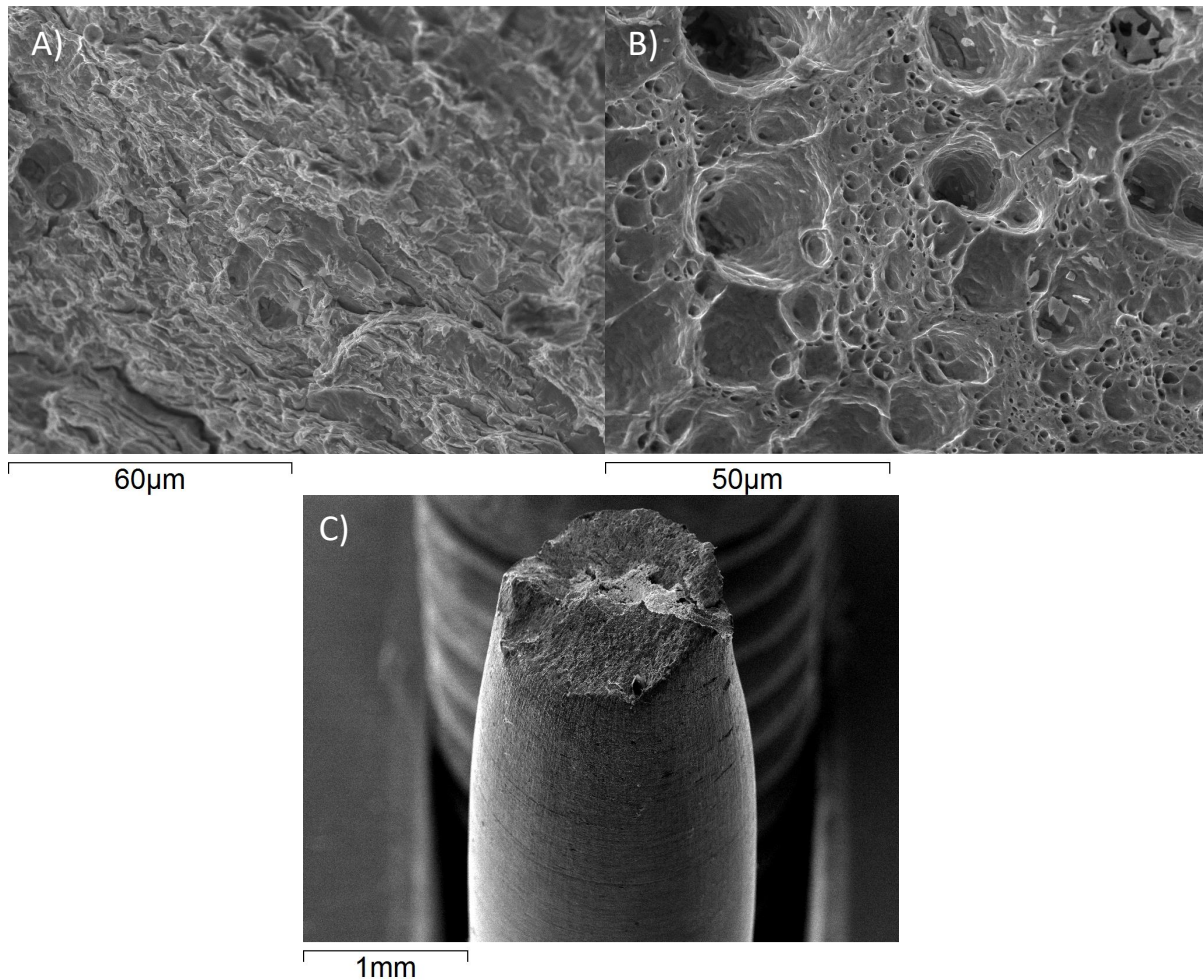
SEM images of sample broken at 195°C A) brittle fracture mode on fracture surface, B) ductile fracture mode on fracture surface, C) side view
